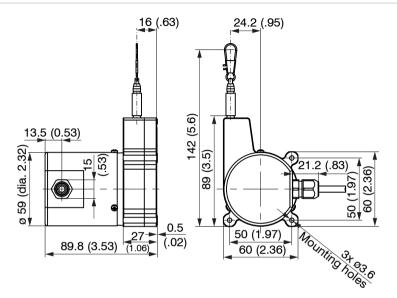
Dimensional drawing WPS- ... -MK60-CR, with potentiometer, dimensions in mm, not to scale
